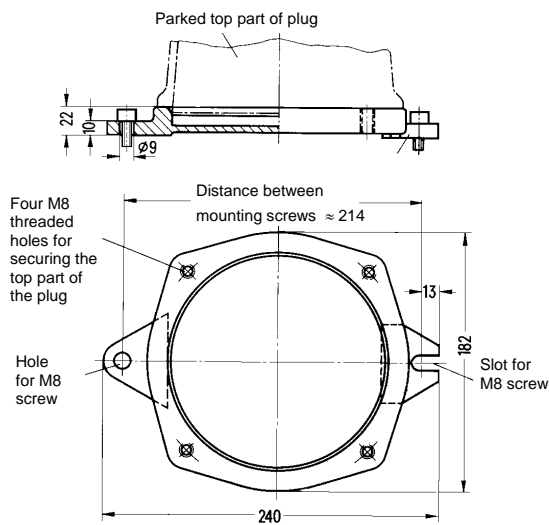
Parking socket for protecting and securing the removed top part of the plug
